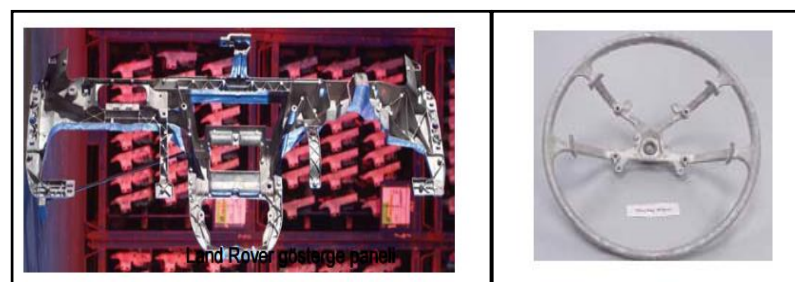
Land Rover Dashboard and steering wheel produced from magnesium alloy [117].
